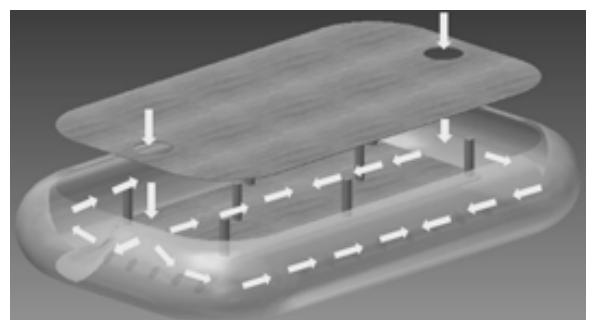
Prototype 2 (exploded view, isometric view) showing indicative air flow in the skirt
